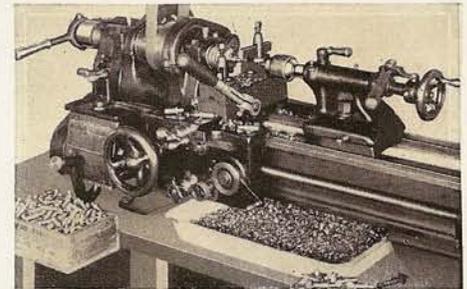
Production Work with Lever Type Draw-in Chuck, Tailstock and Cross Slide
